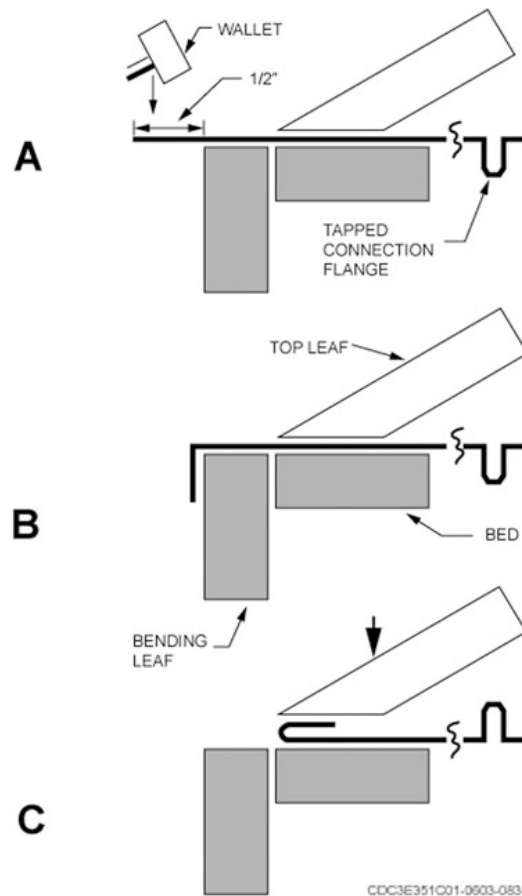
Using a cornice brake to bend 180° fold for a drive slip.
